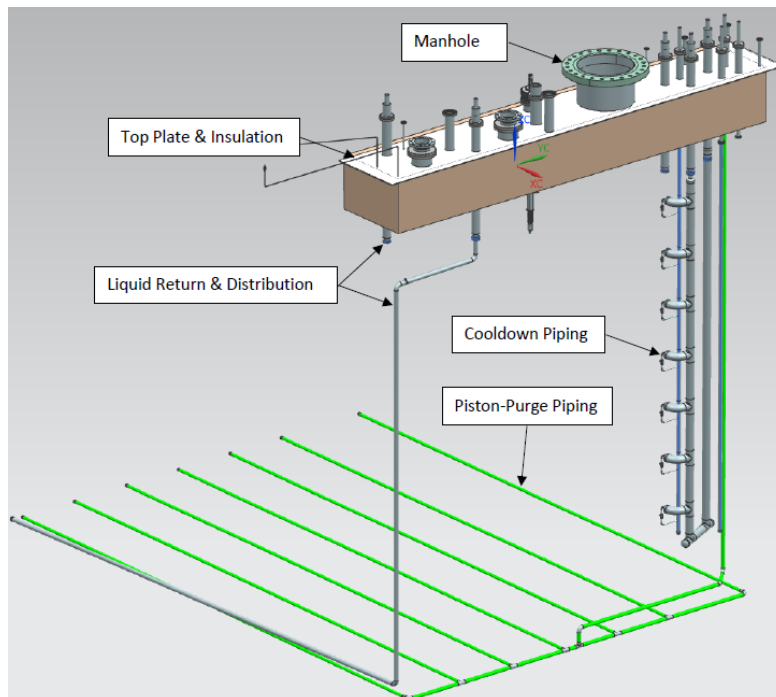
Piping layout of the SBND Internal cryogenic sub-system.
